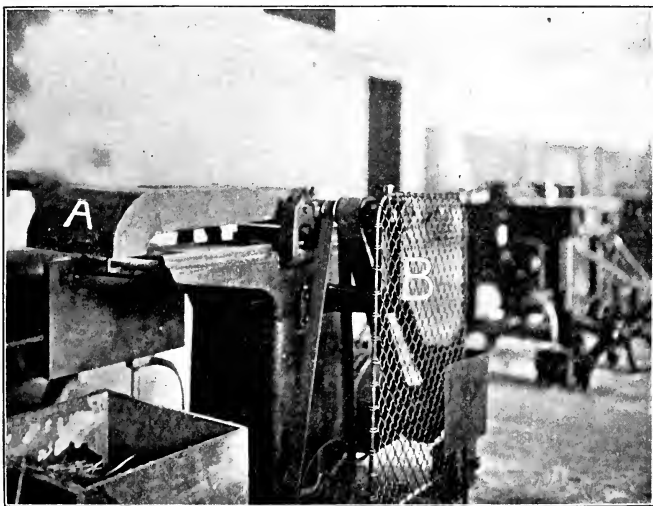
Illustration No. 19. Type-high machine with cutter head, belt and pulley drive inclosed.
